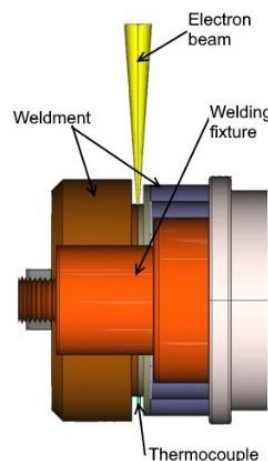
Design of weldment and weld position and orientation of electron beam and placement of thermocouple during pre-heat process
